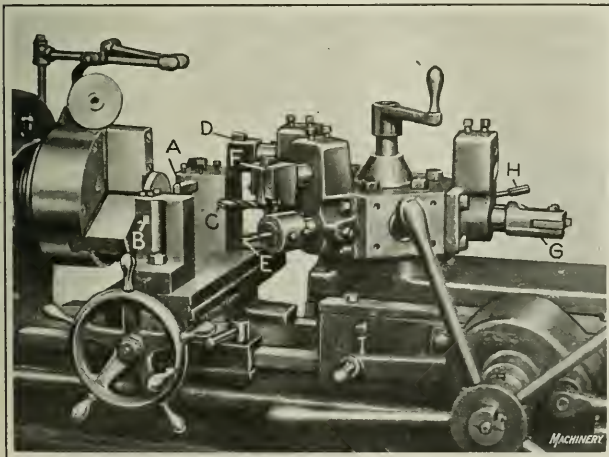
Turret Lathe Equipment used for boring, counterboring, and facing Water Pump Impellers
